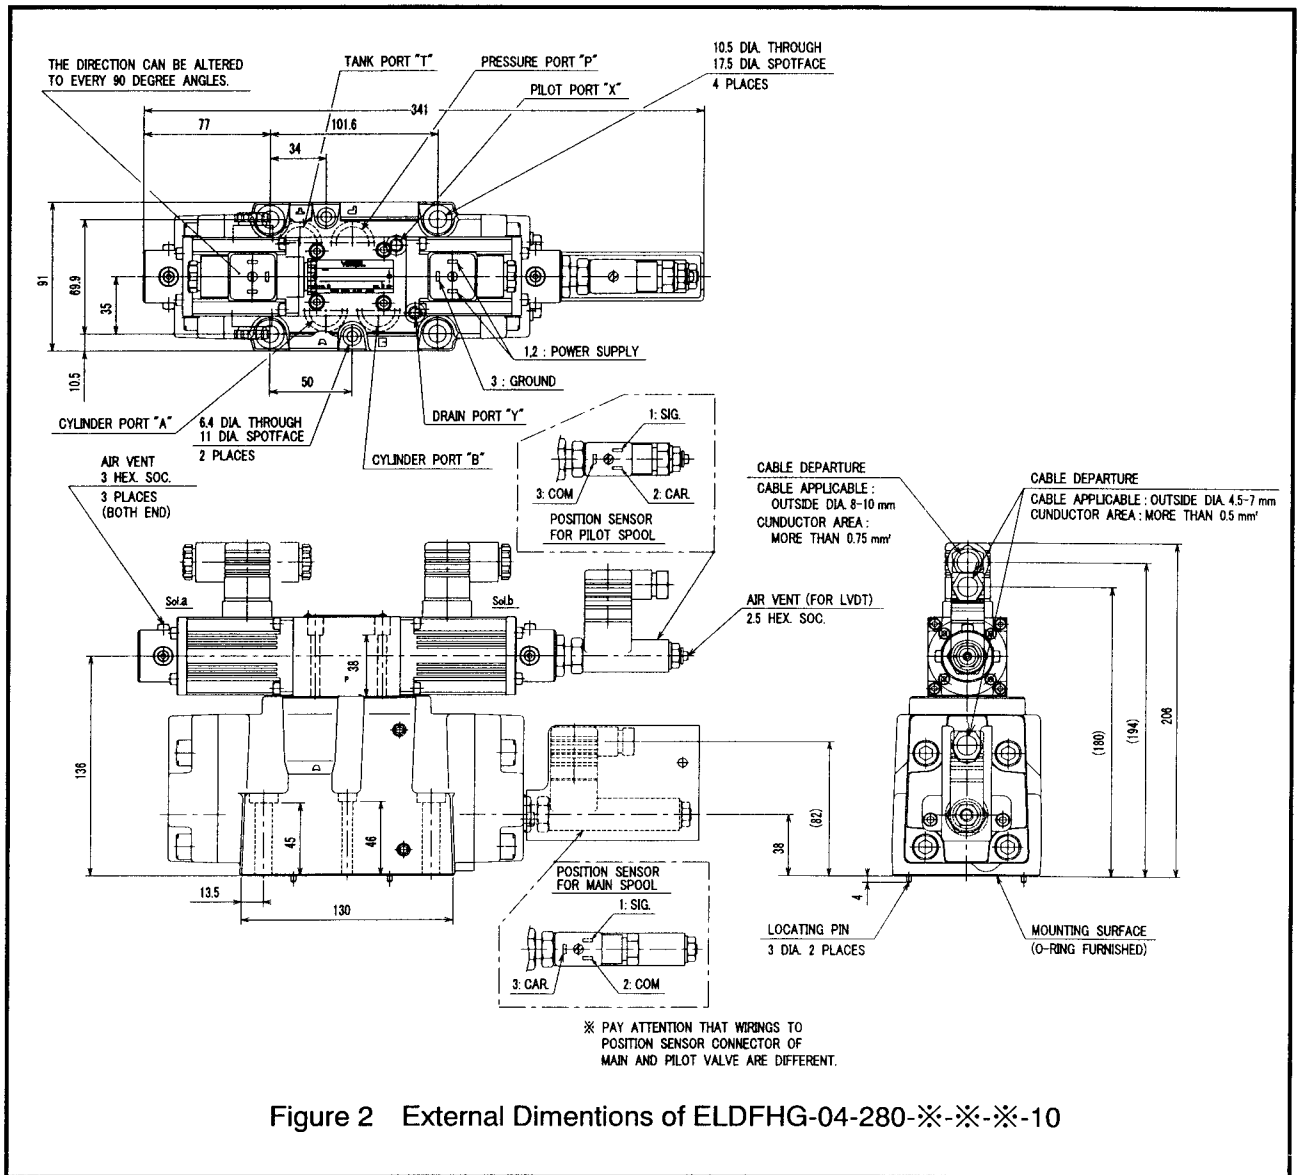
External Dimensions of ELDFHG-04-280-※-※-※-10
